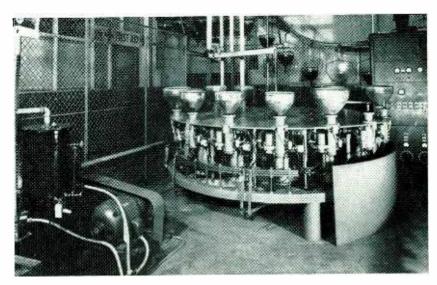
In this aluminizer machine, each tube position has a separate diffusion pump and electrically operated roughing and bypass valves. Mechanical backer pump at left connects through a rotating joint
